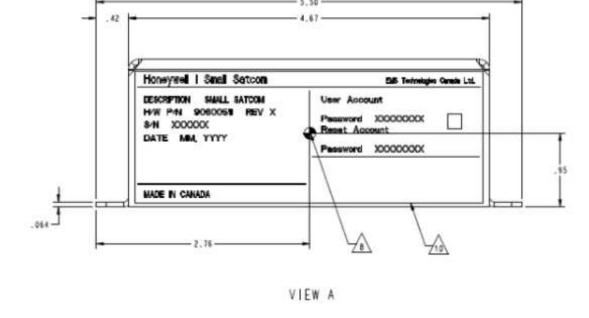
(Sheet 1 of 1) Indoor Unit Dimensions
